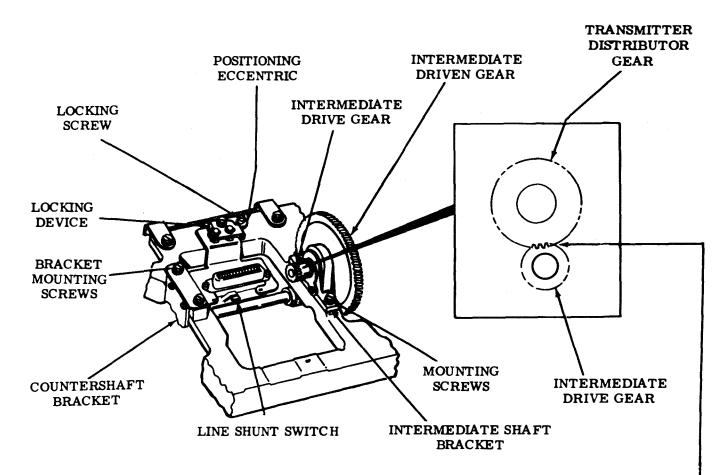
Intermediate Gear - Countershaft Gear Backlash
